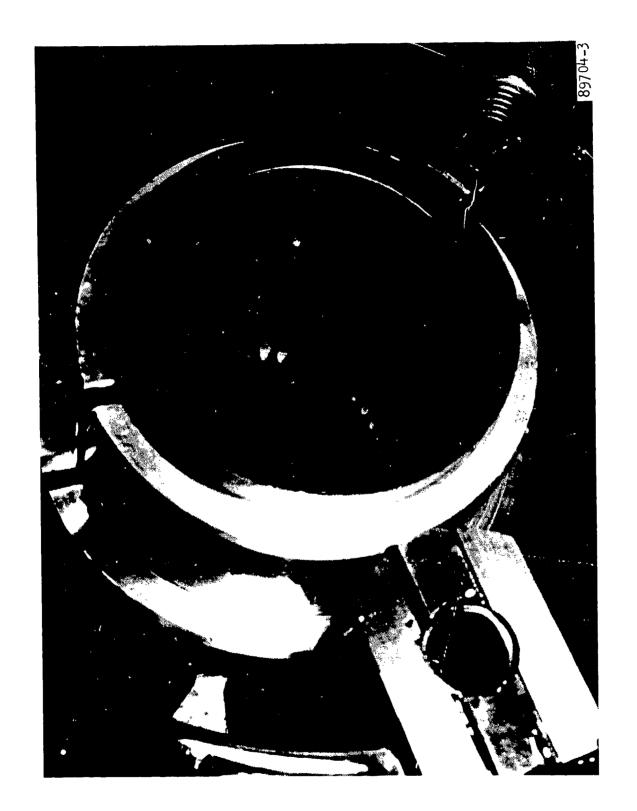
Rotor-Holding Fixture Opposite Spline End
